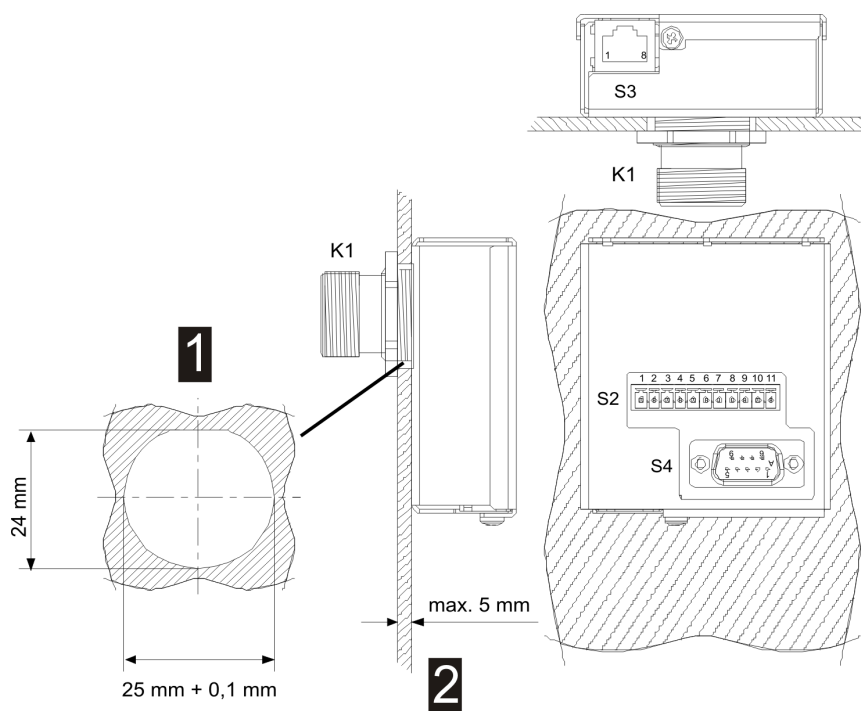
Dimension drawing for the mounting opening of the JB 001
